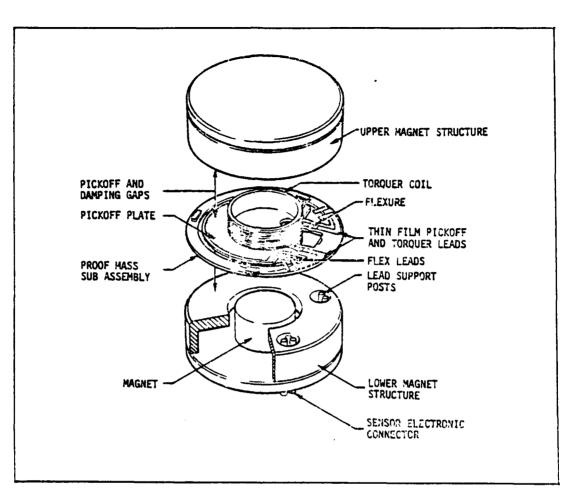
QA-1100 Sensor Assembly, Exploded View [7:1-4]
